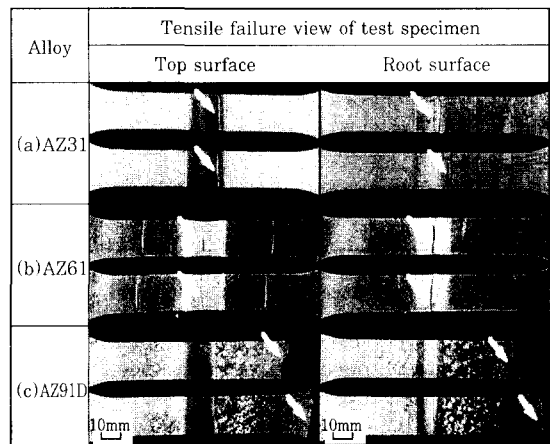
Fracture location after tensile test of FSWelded AZ31, AZ61, AZ91D Mg alloys (a) 1500rpm-1000mm/min (b) 1500rpm-200mm/min, (c) 1000rpm-50mm/min
